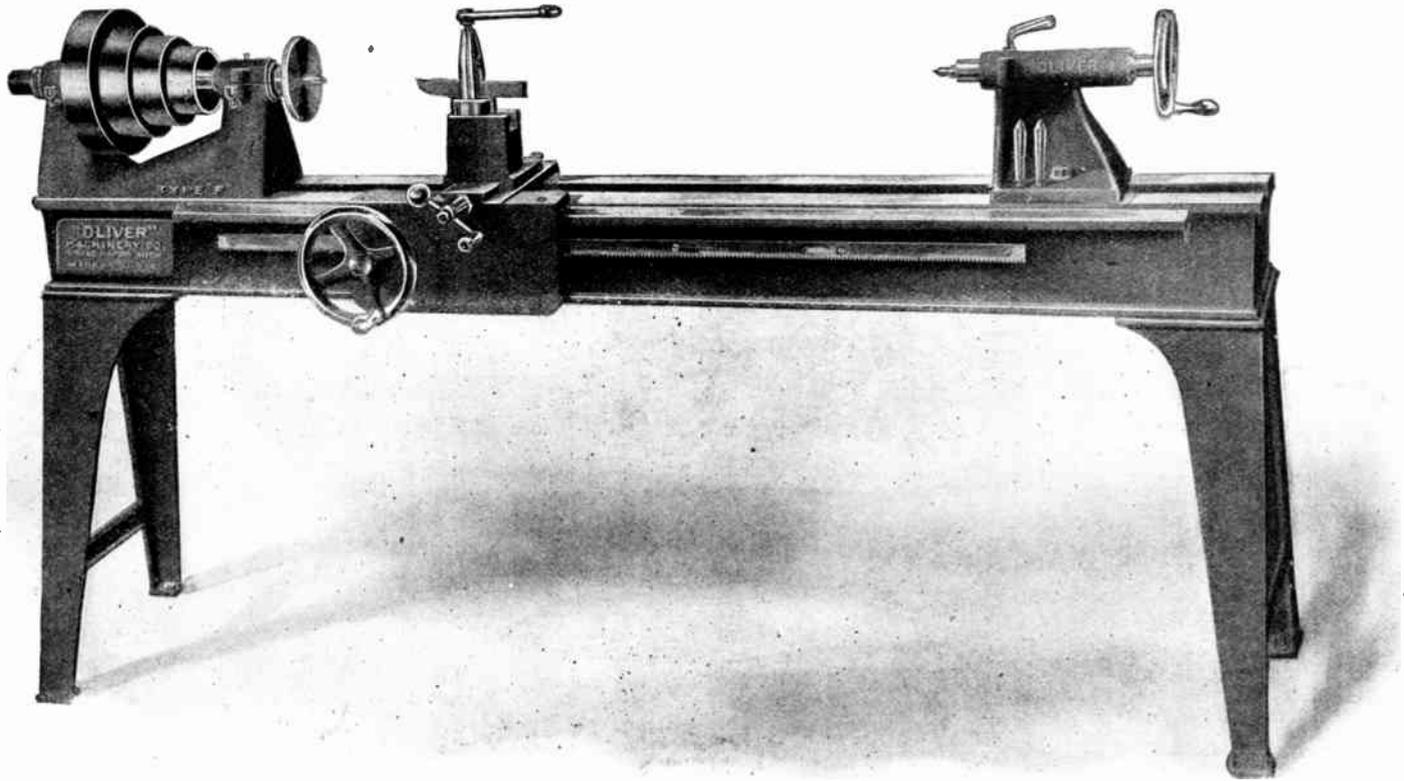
Metal Bed Wood Lathe with Hand Feed Carriage
